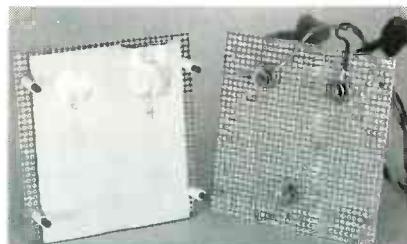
THE BATTERY JIG uses two pieces of perforated construction board, screws, spacers, and springs from an AA-cell holder. Nylon screws hold the contact springs to the fixture.
